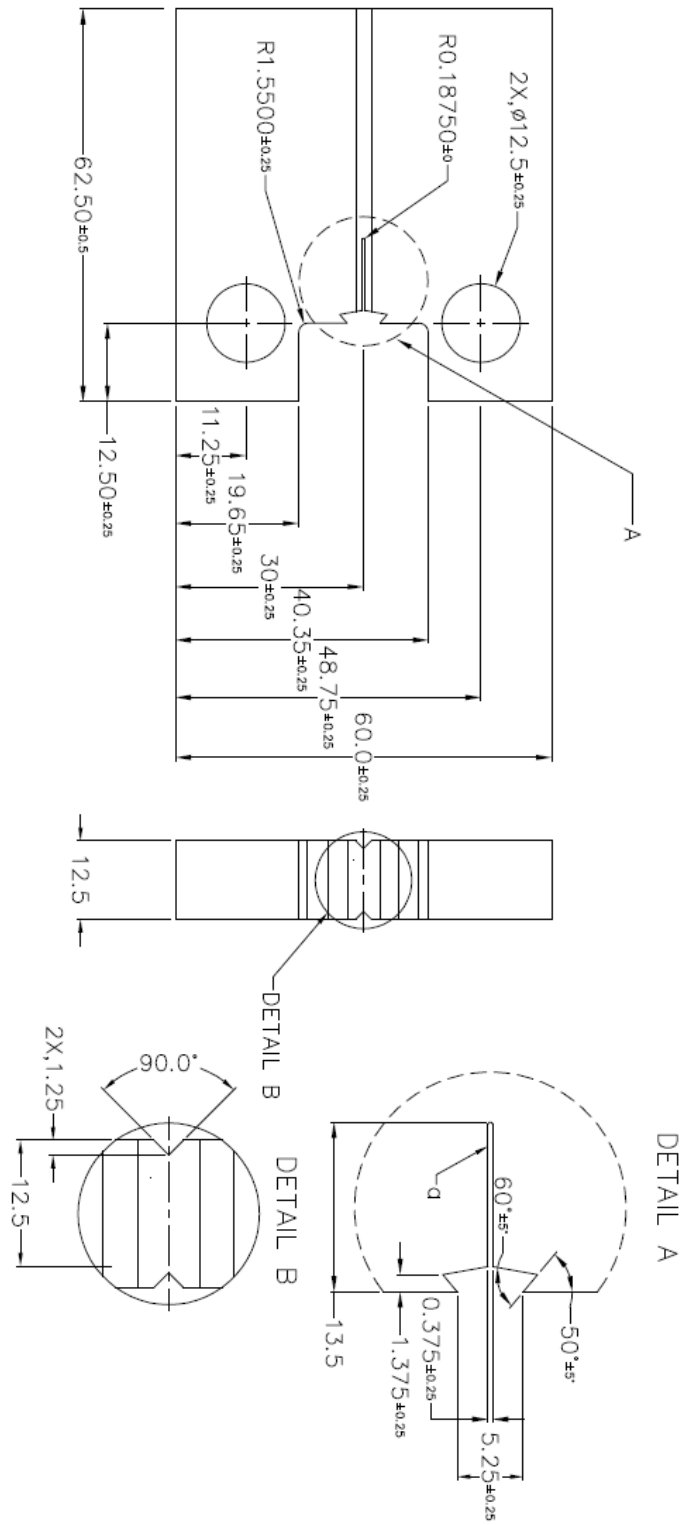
Specimen drawing for C(T) (all dimensions in millimeters).
